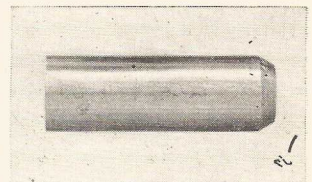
Tool for installing oil slinger on crankshaft. No. S-271.
